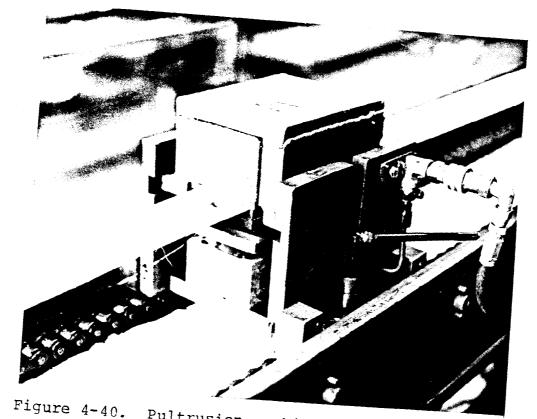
Pultrusion machine puller clamped on pultruded preform.
